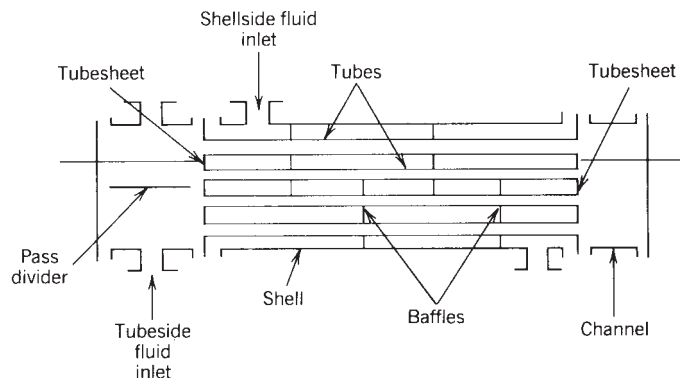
Schematic illustration of shell-and-tube heat exchanger construction.
